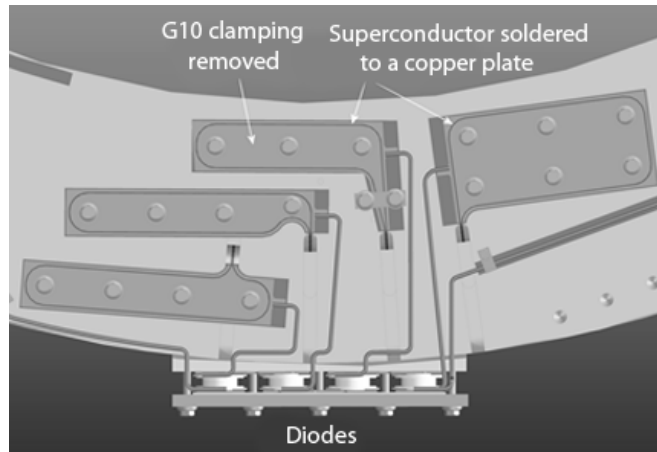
Superconducting subdivision end loop penetrations are shown soldered to a copper plate on the coil housing side flange. G10 clamping is removed. Copper bus connections to cold diodes are also shown.
